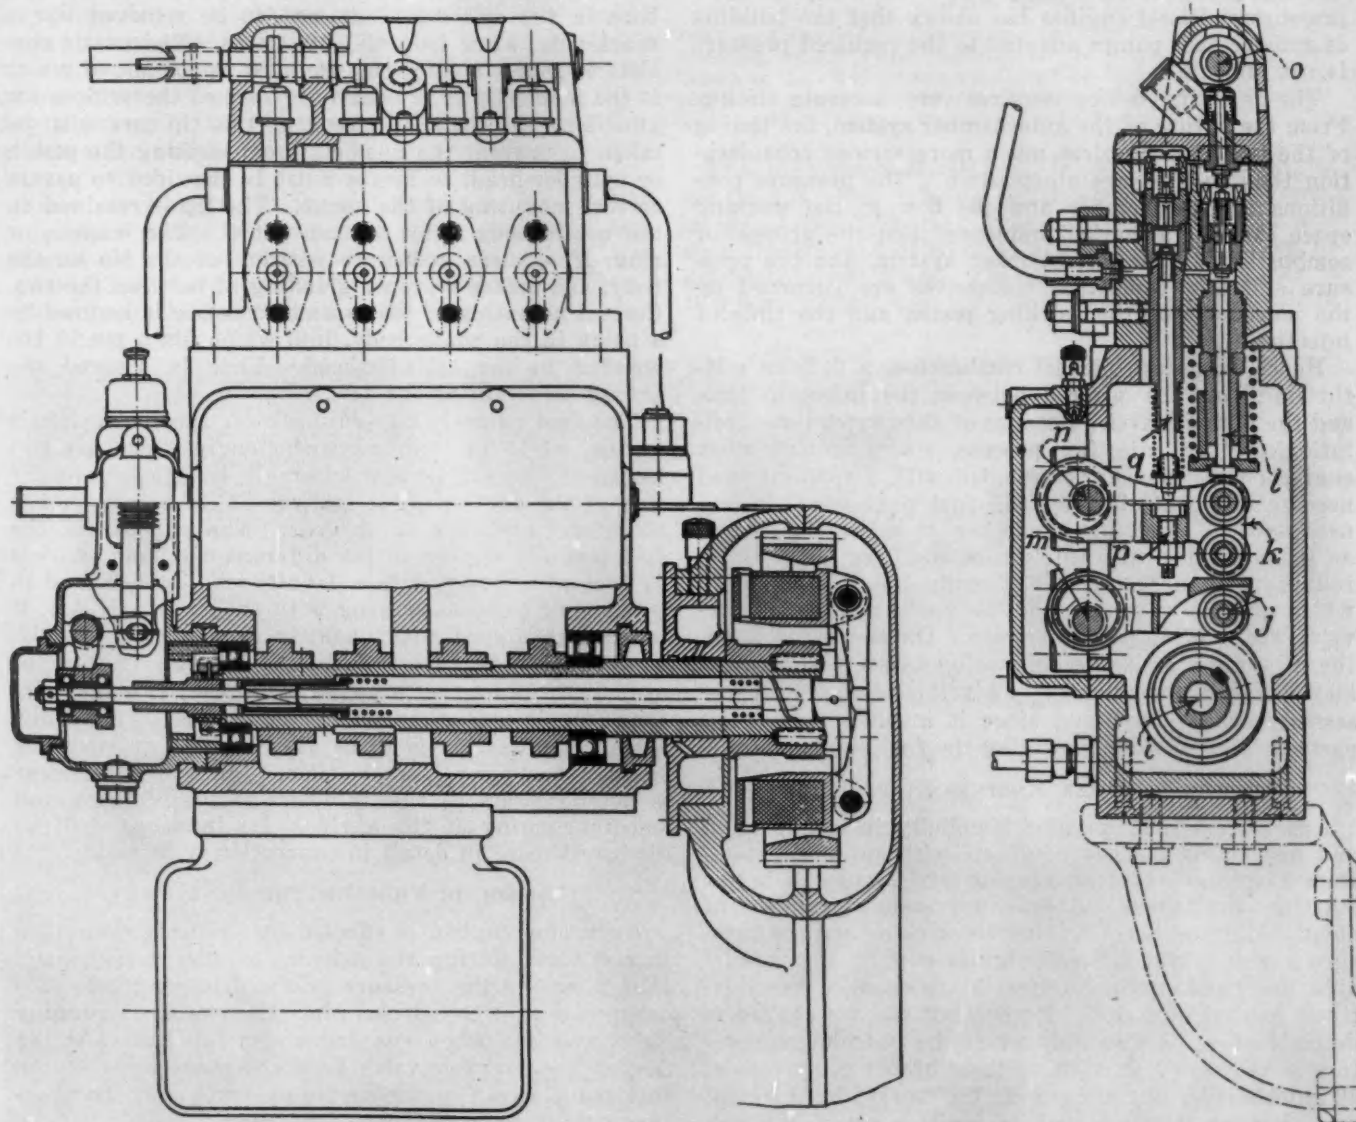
SECTIONAL DRAWING OF FUEL PUMP
